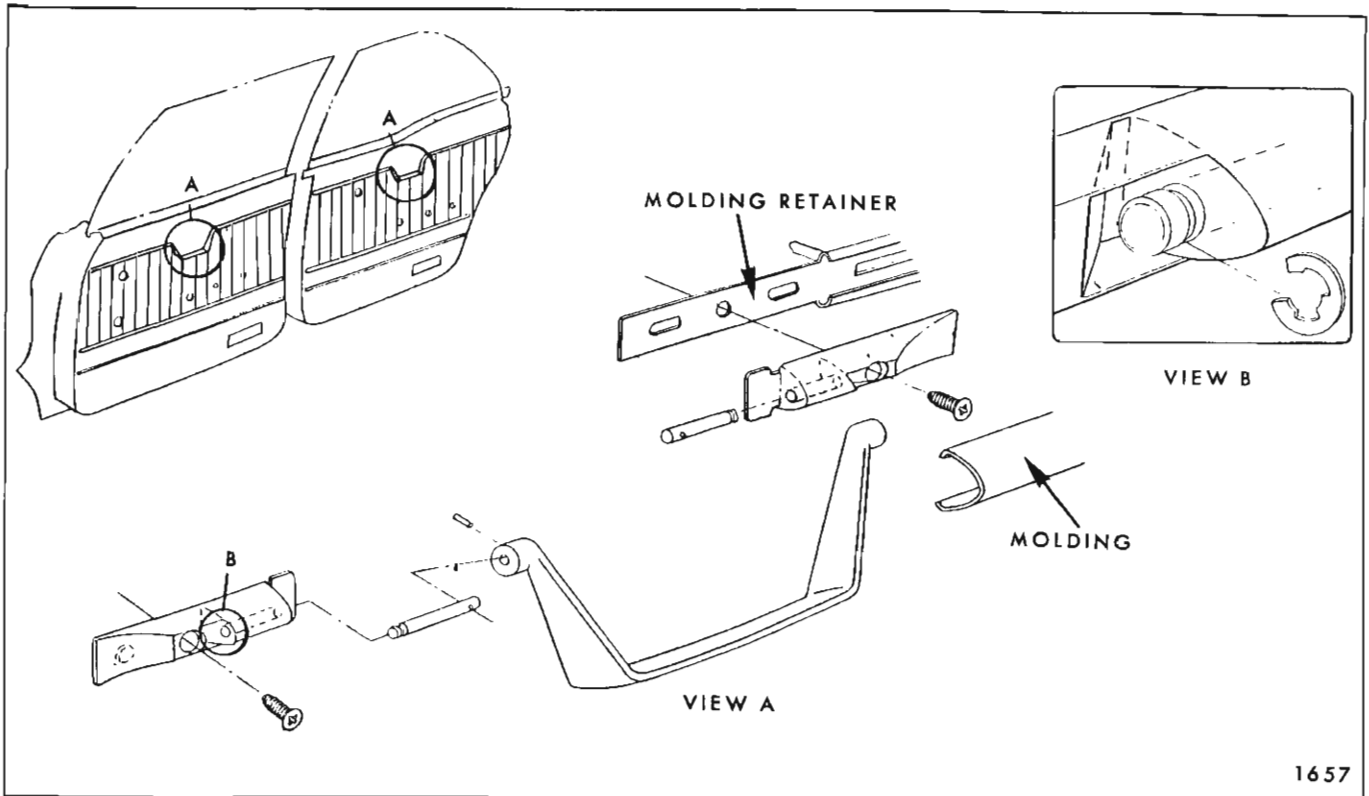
D7—Door Pull Handle Installation - 26239 Style
